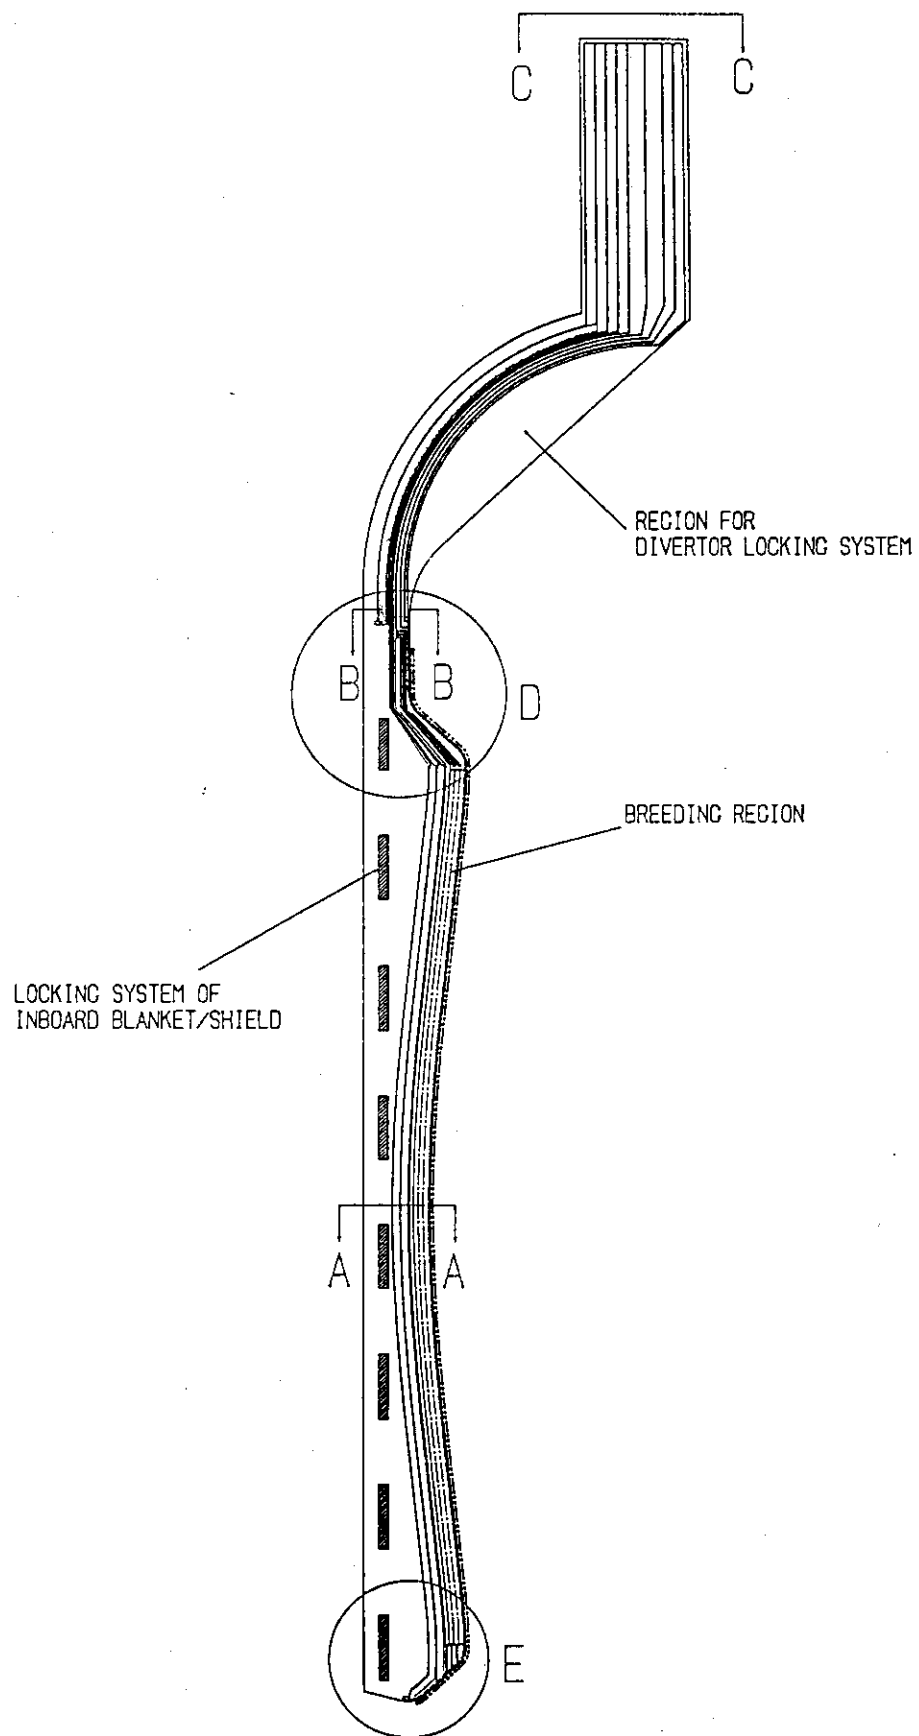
Elevation view of inboard blanket (mixed pebble bed blanket)
